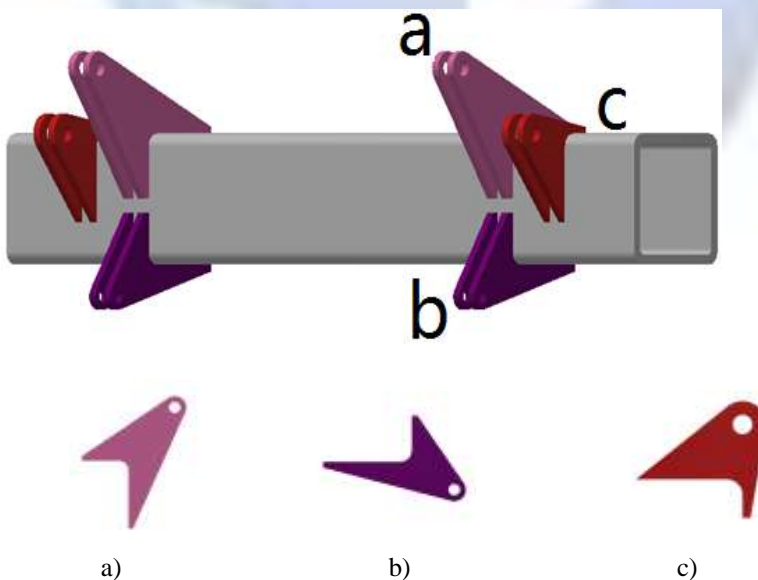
Ear Plate a) upper ear plate b) lifting ear plate c) rotating ear plate
